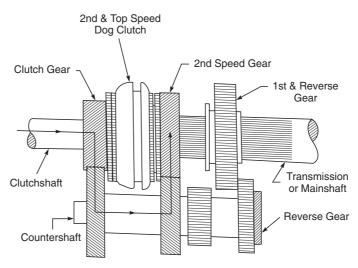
Layout of Three Speed Gear Box in Natural Position
